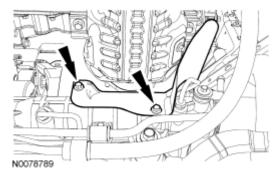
Locating Engine Lifting Eye & Bolts Courtesy of FORD MOTOR CO.
